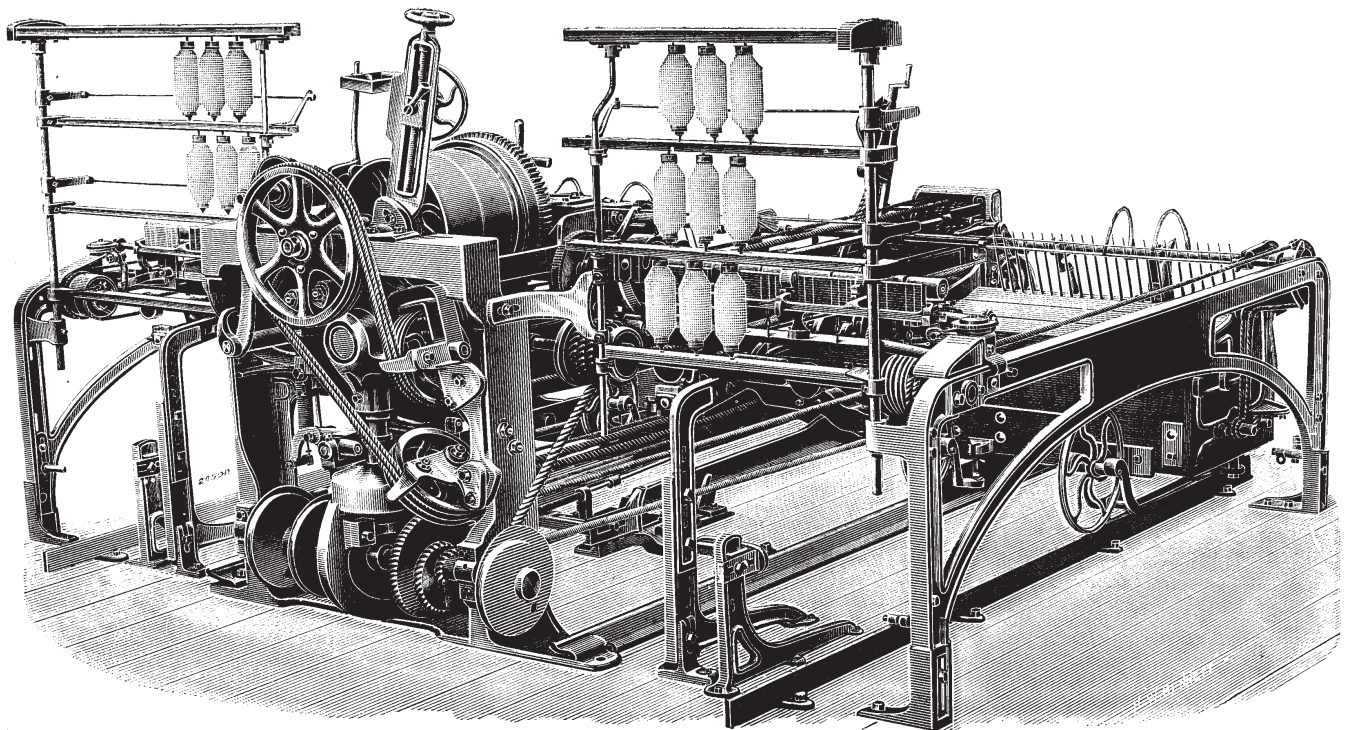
REAR VIEW OF MULE HEADSTOCK WITH PART OF CARRIAGE.
